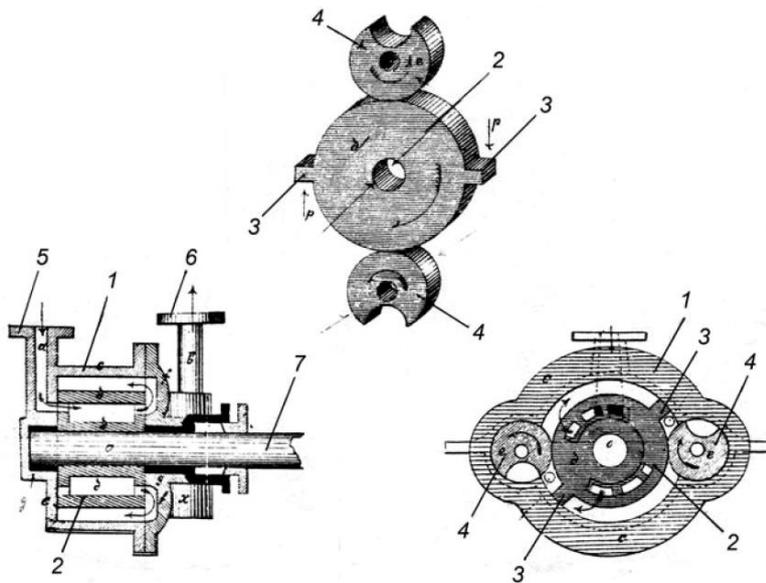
Diagram of a rotary machine designed by N.N. Tverskoy (1 - housing, 2 - rotor, 3 - pistons, 4 - sealing rollers, 5,6 - steam supply and exhaust pipes, 7 - shaft).
